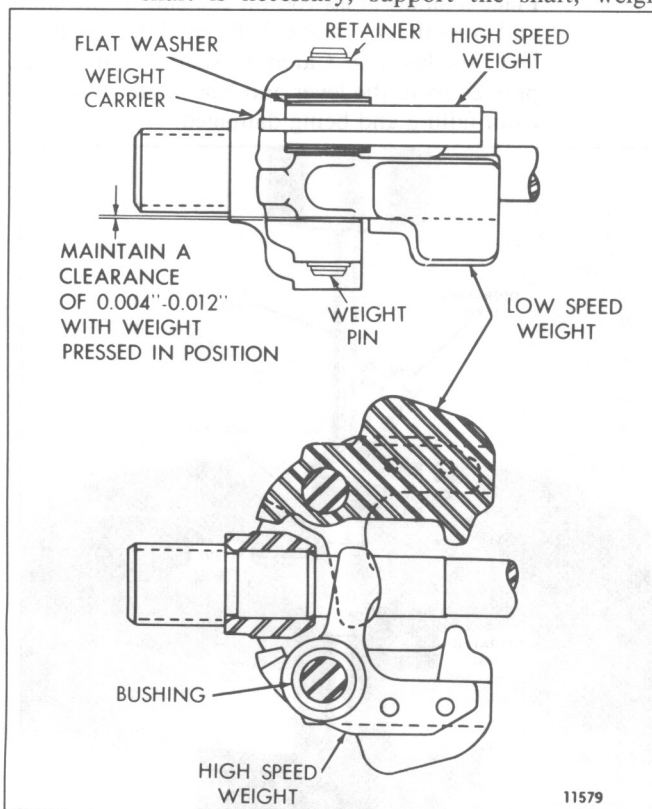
Cross Section of Governor Weight Assemblies (Turbocharged Engines)
